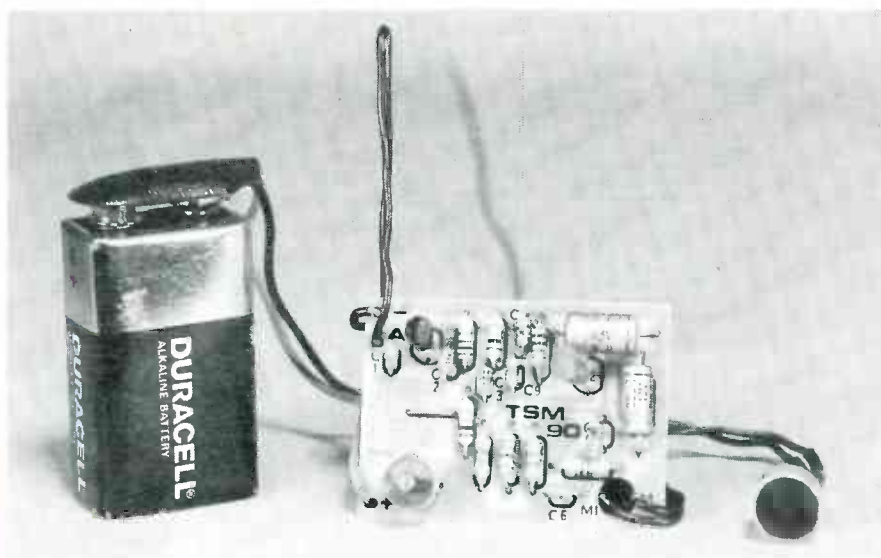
THE FULLY ASSEMBLED PC BOARD. This FM transmitter board is so small, measuring $1\frac{1}{16} \times 1\frac{3}{16}$ inches, that it will fit inside almost anything.
